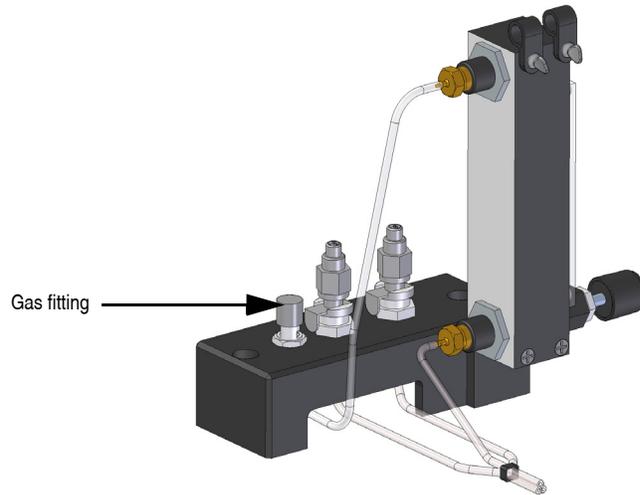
The heater/cooler gas ring attached to the heater/cooler base. Dimension 3100/V shown.
